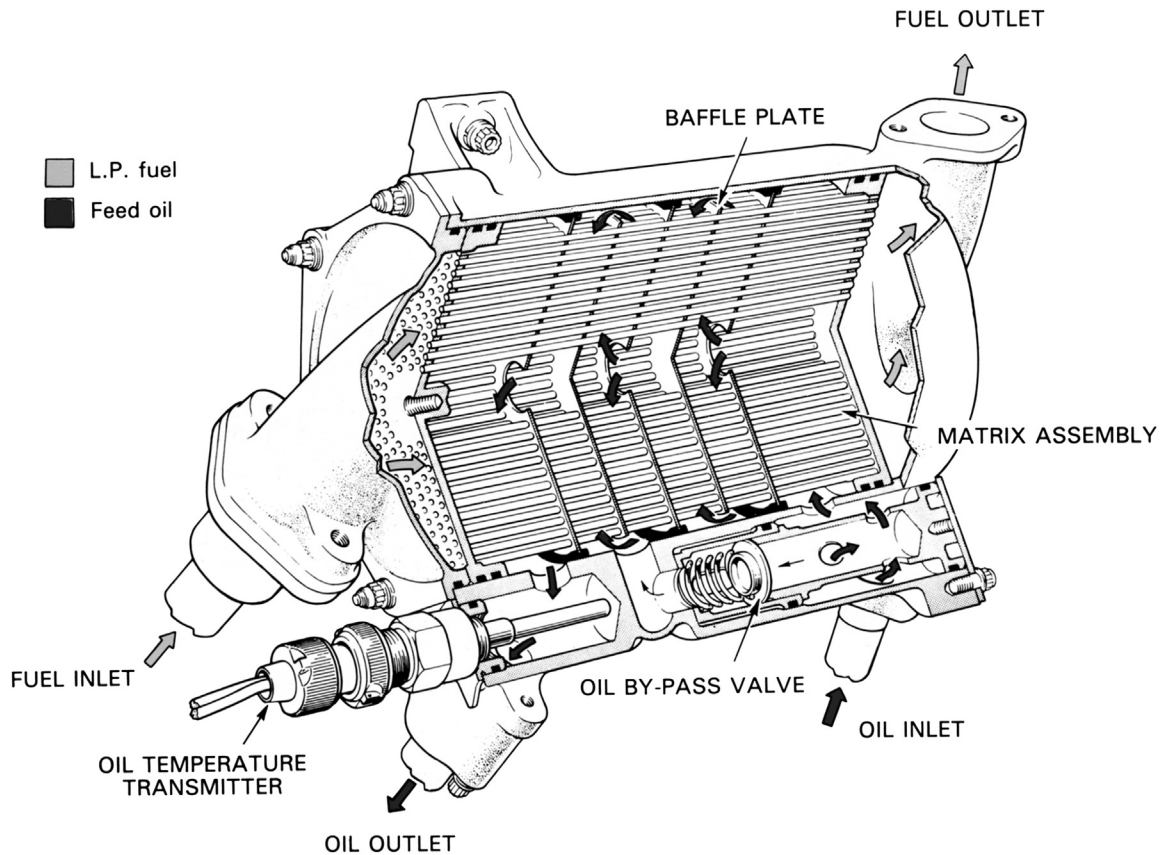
A low-pressure fuel-cooled oil cooler. (Source: Rolls Royce.)
